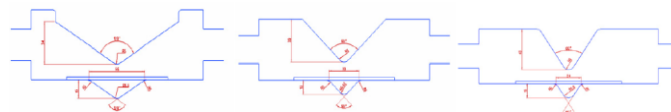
Schematic view of 60°, 90° and 120° V-bending with dimensions
